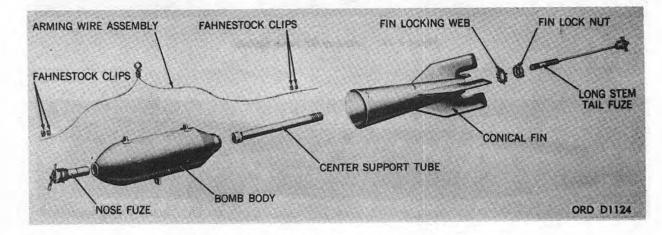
Old-series GP bomb with conical fin assembly, exploded view.
